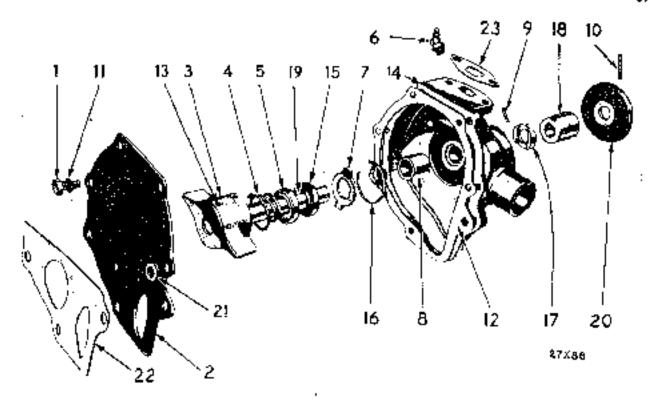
Water Pump (Disassembled View) (1942 Model, Typical of 1936-41 Models)
